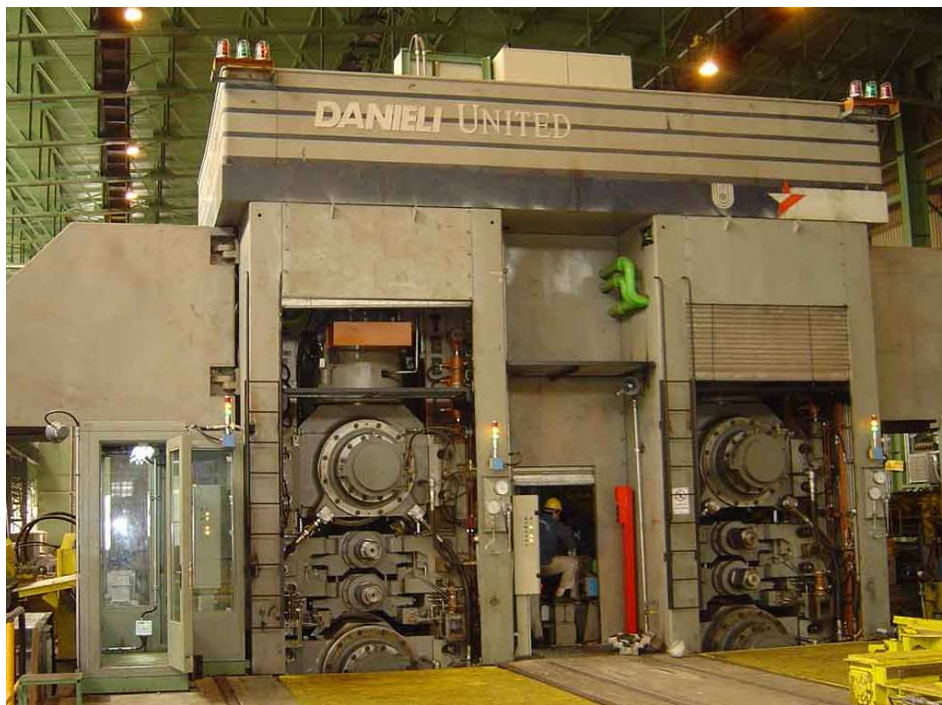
Operator Side of 2-Stand Cold Reversing Mill.
